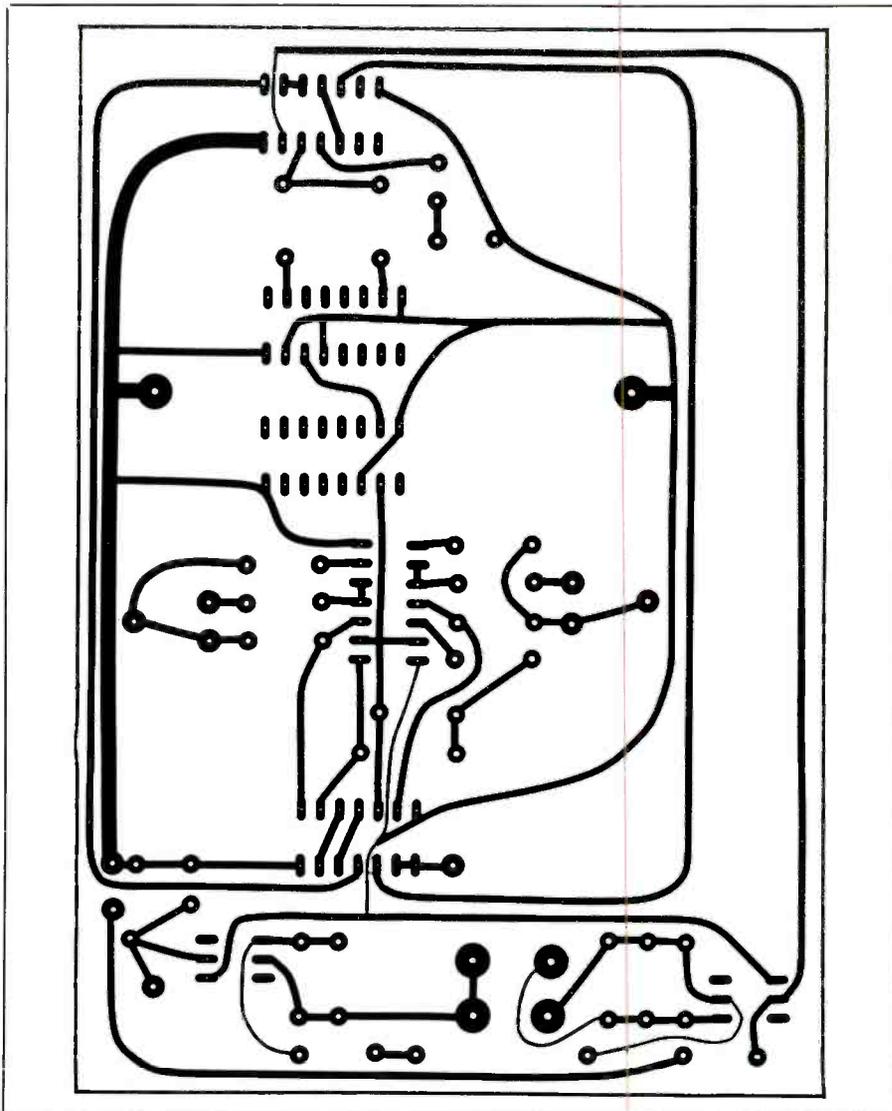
Actual-size etching-and-drilling guide for fabricating project's single-sided printed-circuit board.
